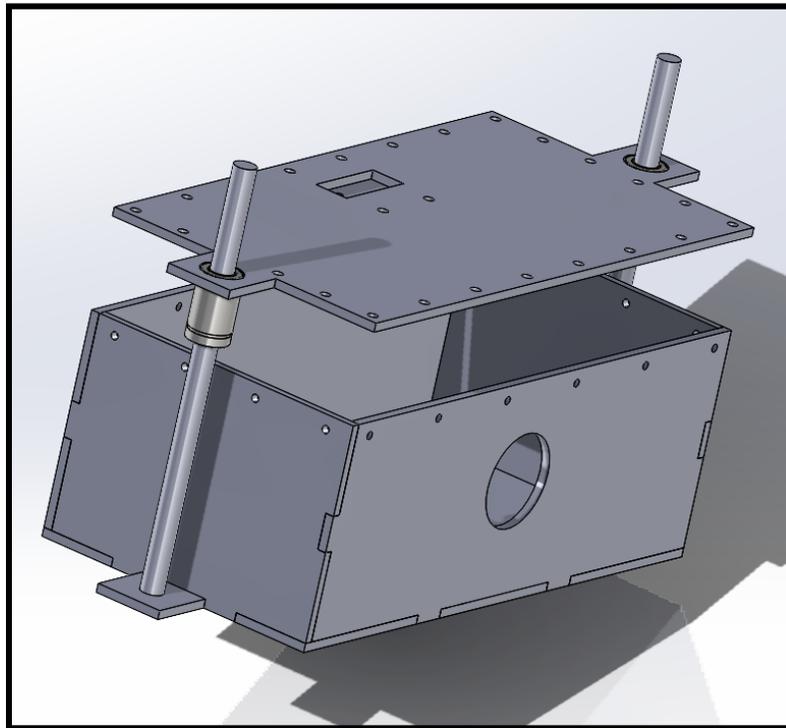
Solidworks assembly of the pressure regulator. Note that neither the bellows or its mounting brackets are included.
